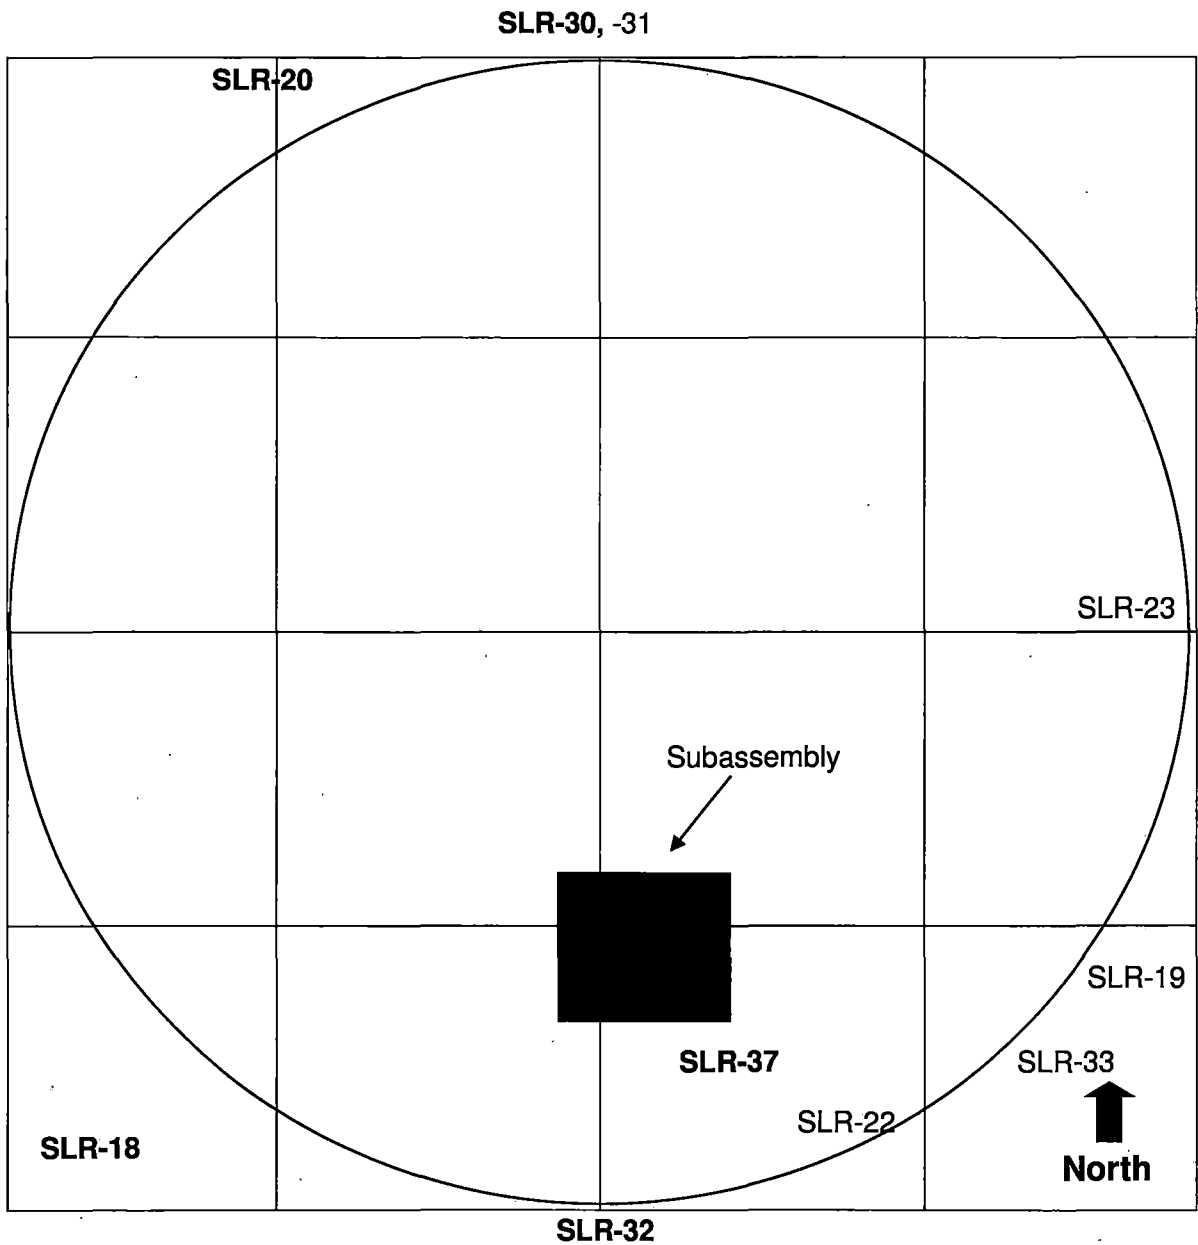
Cask TN-32.23 Protective Cover Inspection (Inside)
